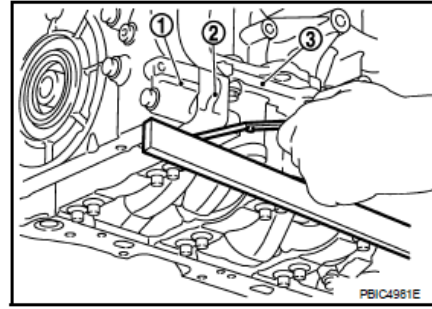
Checking Surface Height Difference Between Oil Pan (Upper) Mounting Surface
